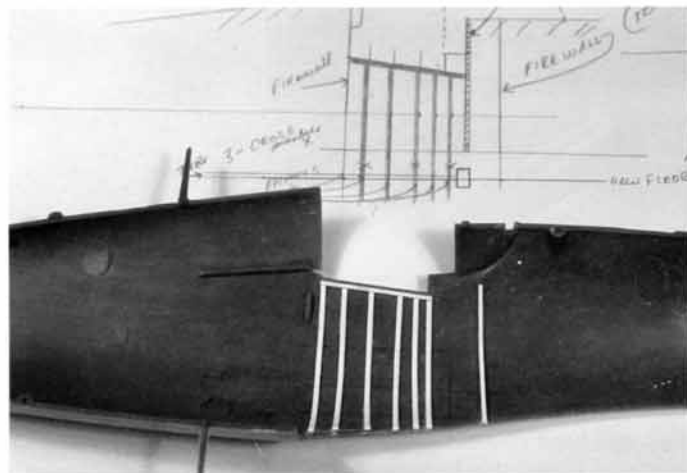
Use the picture that you drew to locate the framing and draw these lines onto the inside area of the fuselage sides, using labeling tape to set the initial lines.
